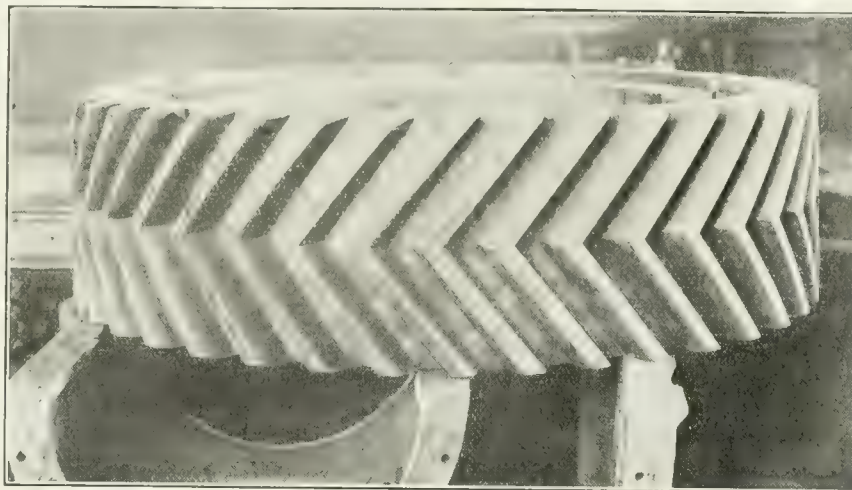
PATTERN OF LARGE HERRING-BONE GEAR.
